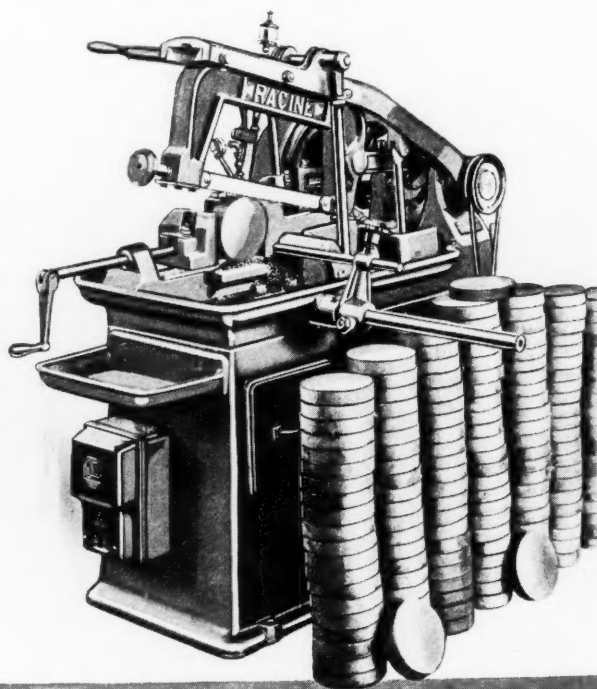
Racine Tool & Machine Co.'s Shear-cut Production Saw and Block of 176 Alloy-steel Pieces, 5 Inches in Diameter, which were Cut from Bar Stock with One Blade at the Rate of 4 Minutes 5 Seconds per Cut
